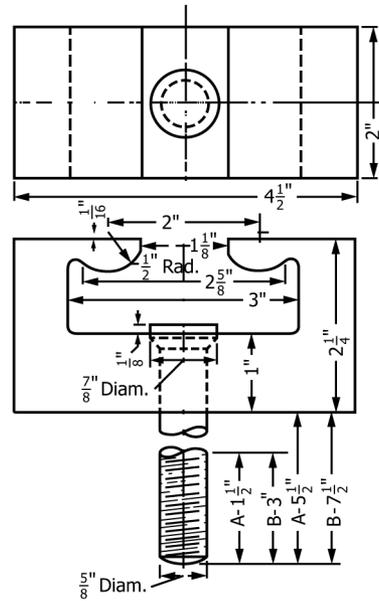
Tension-Perpendicular-to-Grain Test Assembly
